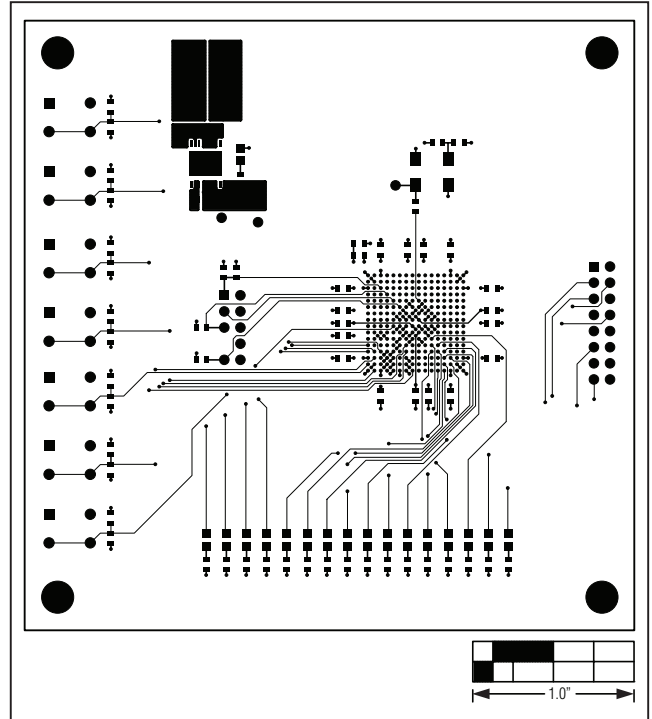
MAX4940 Master Board PCB Layout—Component Side
